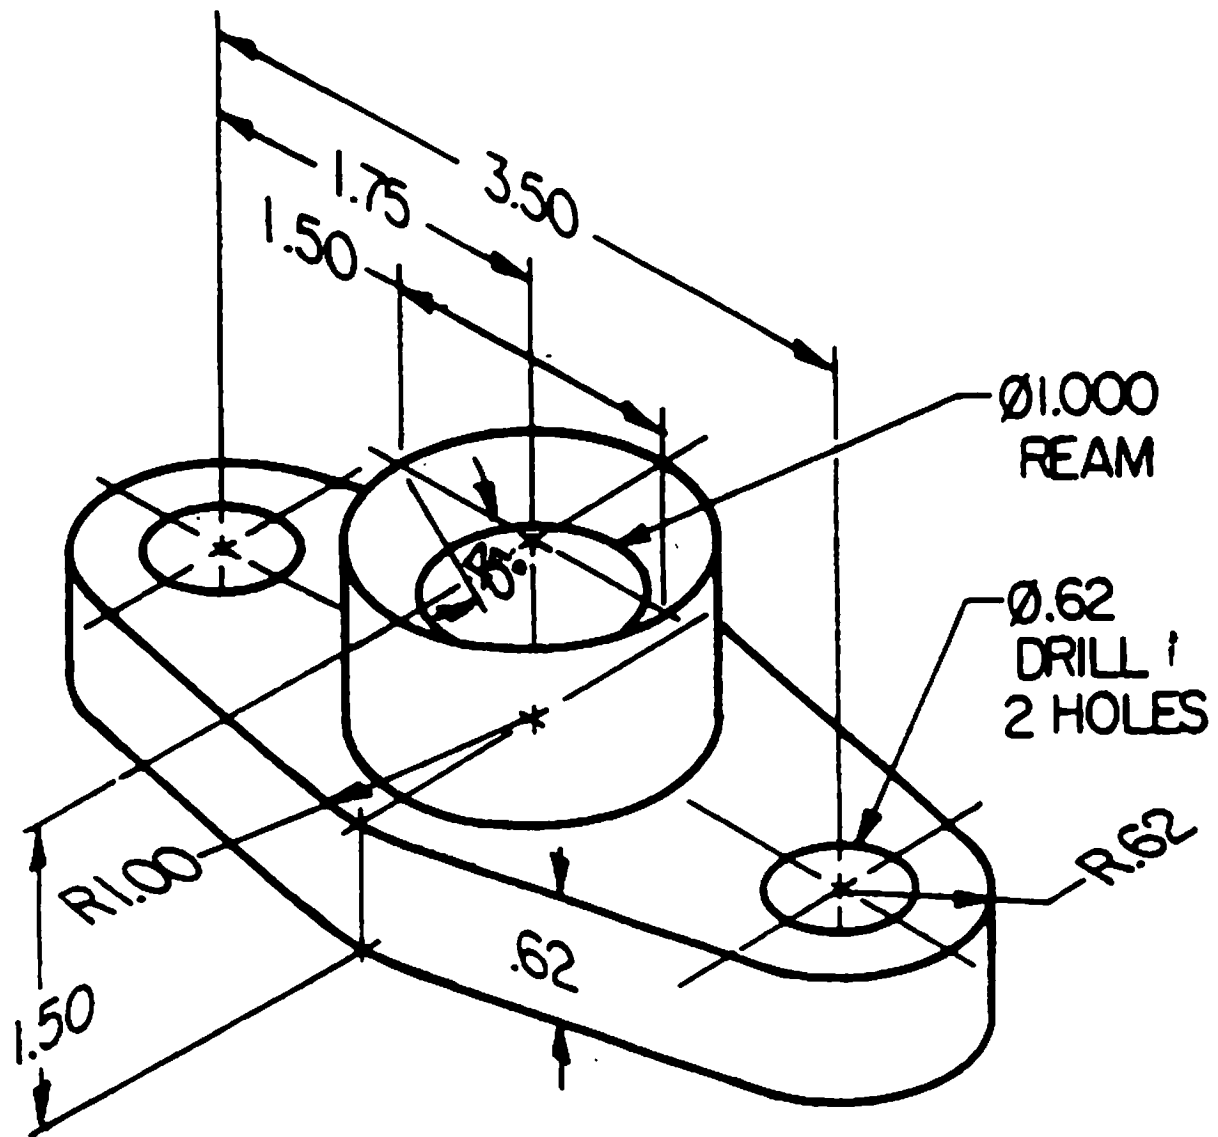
Trunion block. Using Layout C in the Appendix, draw necessary views with instruments. Omit dimensions unless assigned.
